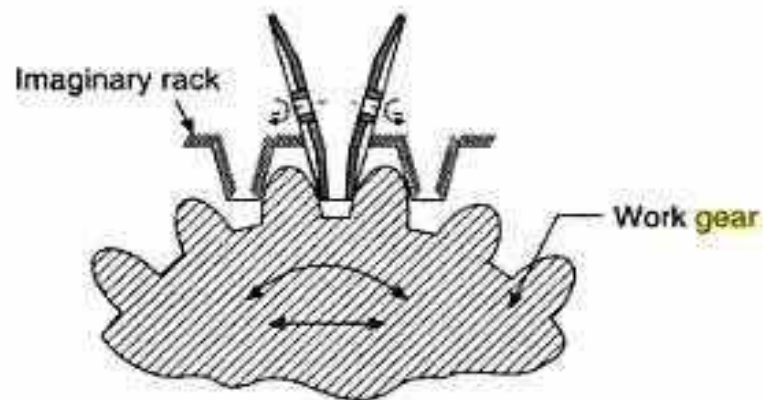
Generation gear grinding with two saucer-shaped grinding wheels.
